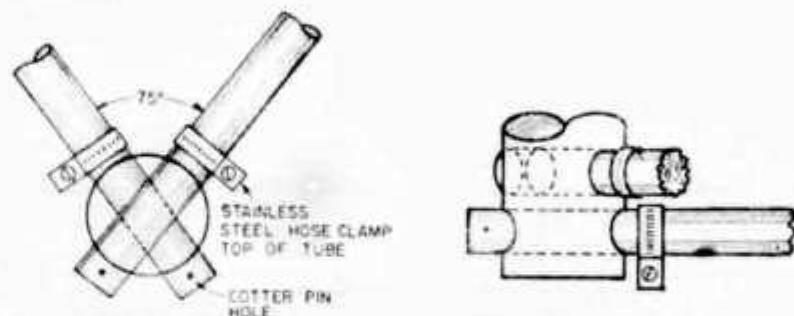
This drawing shows the method of mounting the element to the boom. A cotter pin is used on the under side of the boom and a hose clamp on the top to hold the element securely to the boom.
